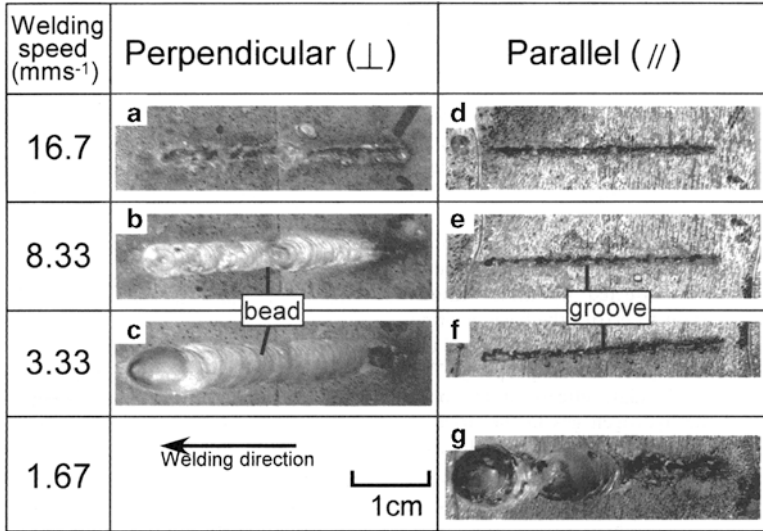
Top views of laser welded specimen at different welding speeds with 3.2-kW constant laser power in 5-mm thickness in (a–c) perpendicular and (d–g) parallel to the pore growth directions. Welding speed: (a) and (b) 16.7 mm s⁻¹, (b) and (e) 8.33 mm s⁻¹, (c) and (f) 3.33 mm s⁻¹, and (g) 1.67 mm s⁻¹ (Reprinted with permission from [4] © 2003 Elsevier Science B.V.)
